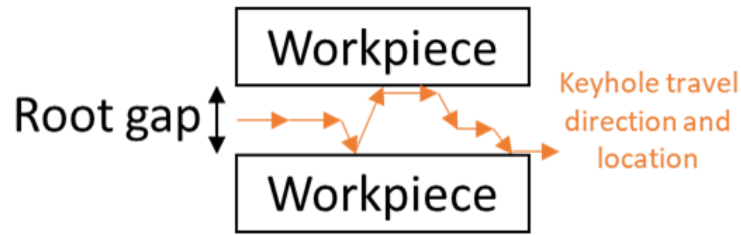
Weld pool travelling between two workpiece edges.
